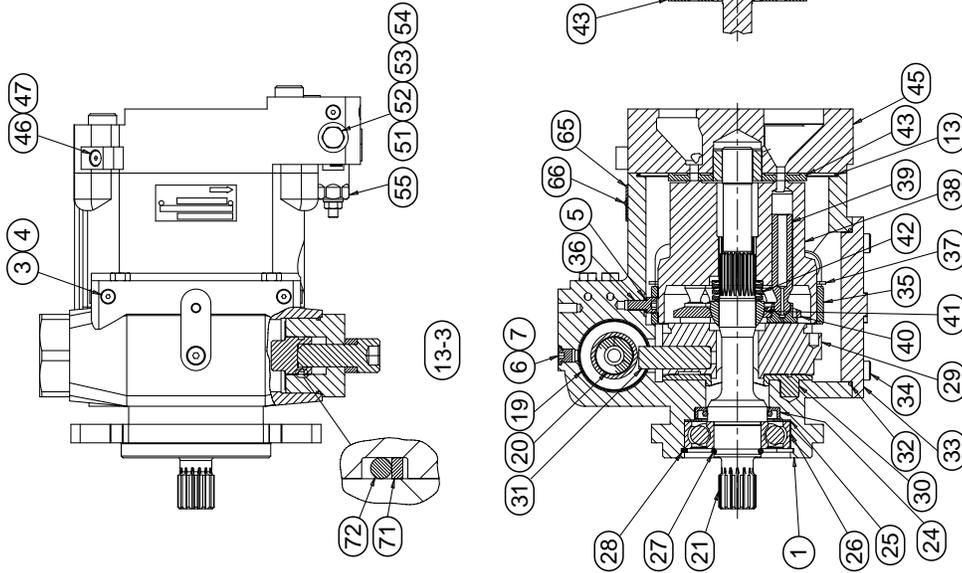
C. Exploded Parts Drawing for PVM-065/-075 B-Frame (519272-202 sheet 3)
